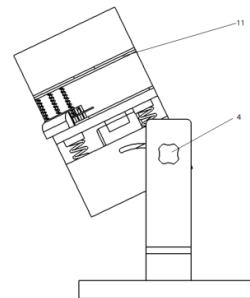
Right side view of the device. 4-Knob; 11-Drive plate
